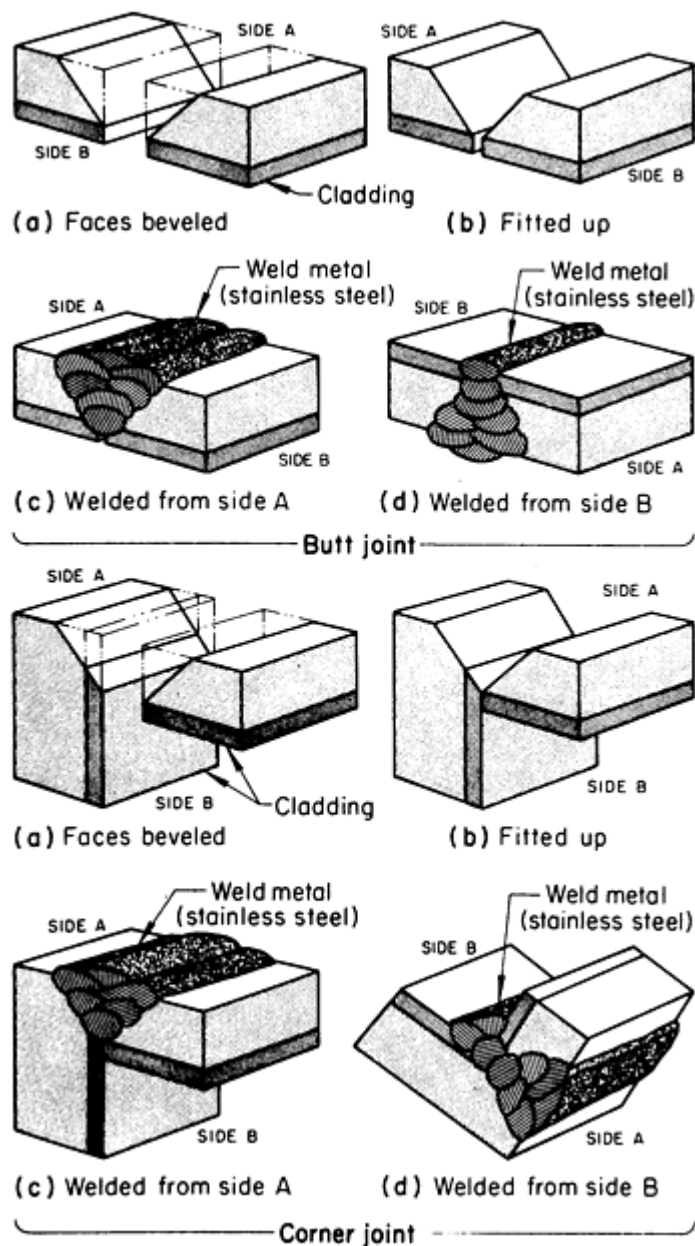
PROCEDURES FOR WELDING V-GROOVE BUTT AND CORNER JOINTS IN STAINLESS-CLAD CARBON OR LOW-ALLOY STEEL PLATE, USING STAINLESS STEEL FILLER METAL EXCLUSIVELY. THE CLAD PLATES ARE BEVELED AND FITTED UP (A AND B, BUTT AND CORNER JOINTS). THE ROOT OF THE WELD IS CLEANED AND GOUGED, IF NECESSARY, BEFORE DEPOSITING STAINLESS WELD METAL FROM THE STAINLESS STEEL SIDE (D, BUTT AND CORNER JOINTS).
